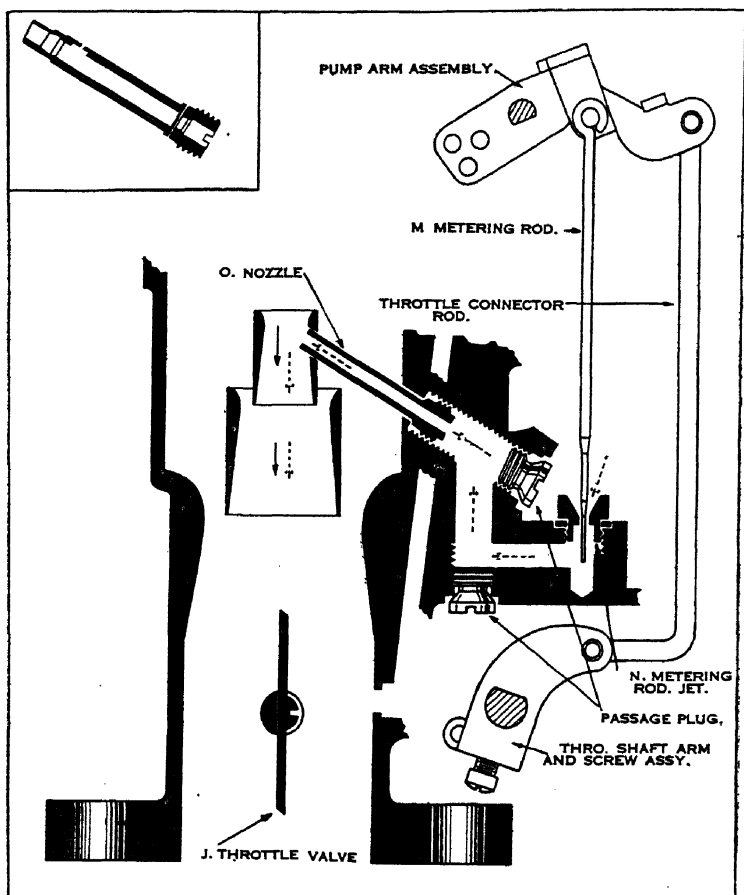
The Carter Carburettor Mechanical Metering Method of Mixture Control.
